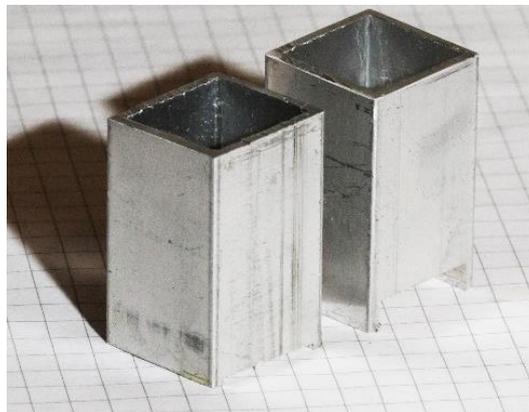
Aluminum scraper tools to apply grease in a layer. Left: 1mm cutout. Right: 5mm cutout.
